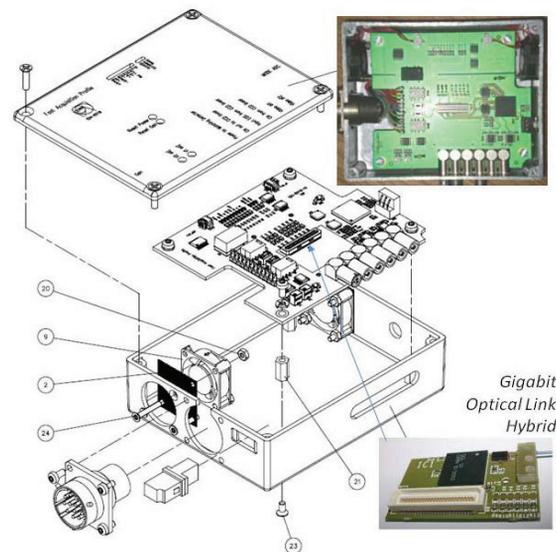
Exploded view and first prototype of the front end electronics using radiation tolerant components.
